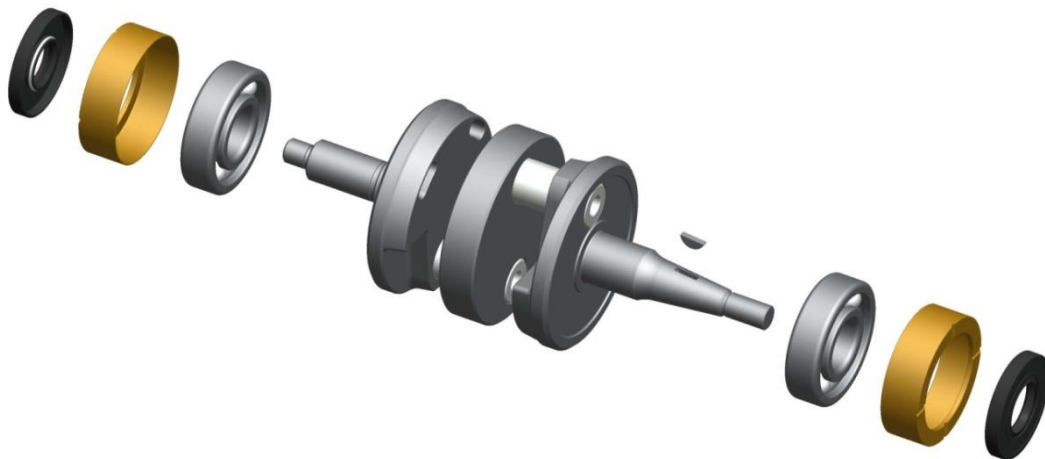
EXPLODED VIEW OF THE CRANKSHAFT ASSEMBLY.
